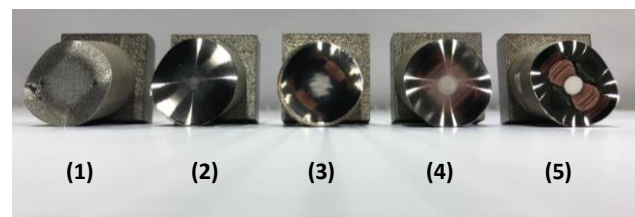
Additive manufactured tool inserts in different manufacturing steps; (1) Additive manufactured; (2) Milled surface; (3) Laser polished surface; (4) milled again; (5) Abrasive pad polished surface
